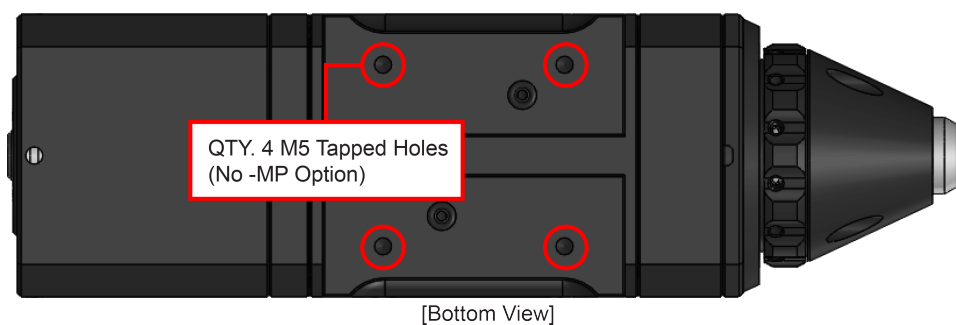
ASR1300 Stage Without Mounting Plate (Bottom View)
